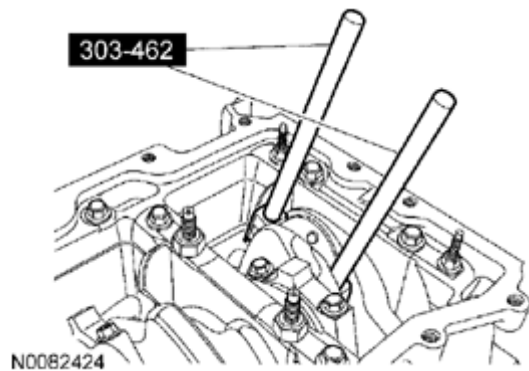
Removing Piston/Rod Assembly From Engine Block Using Connecting Rod Installer
